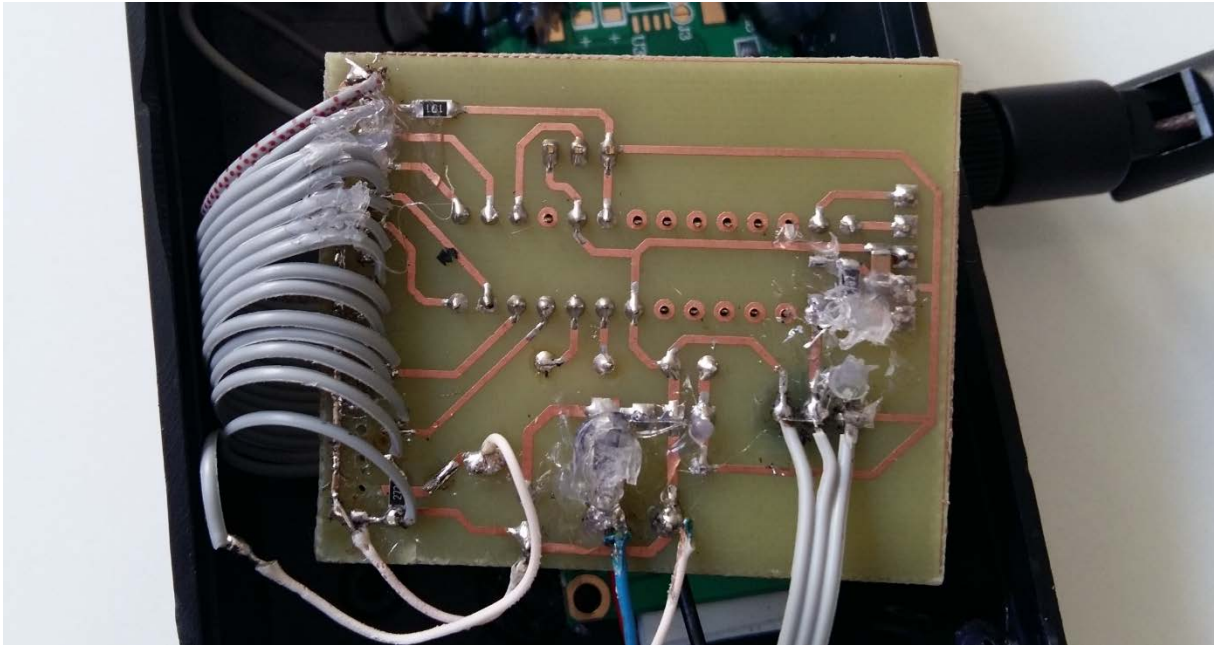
Bottom view of the designed transmitter (master) sensor node.
